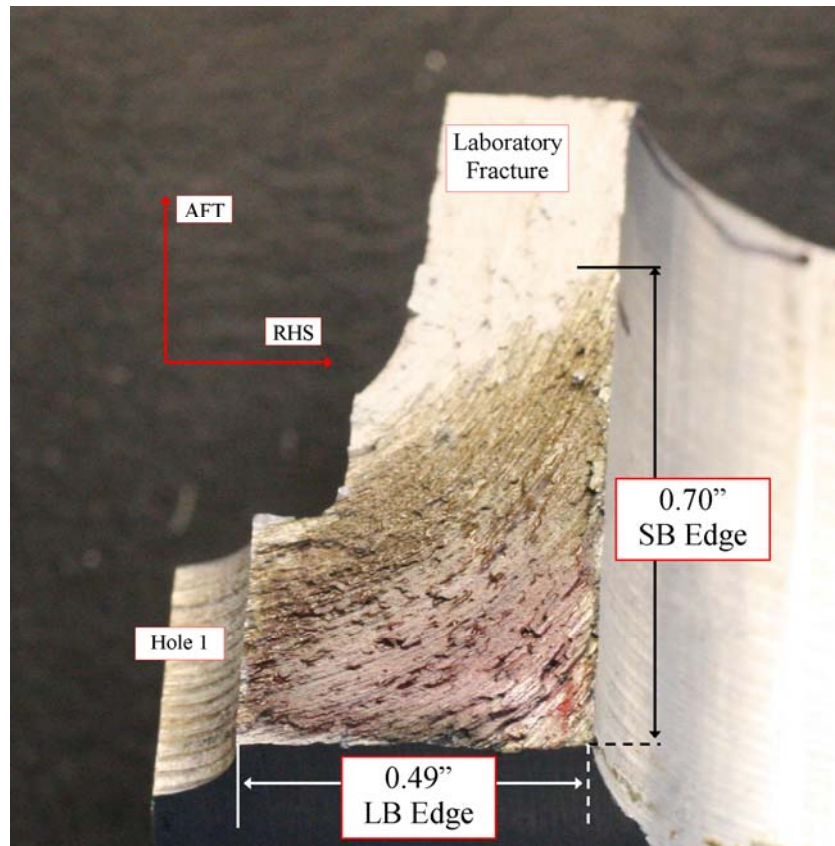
Face of Hole 1 Crack from A/C N7545P
